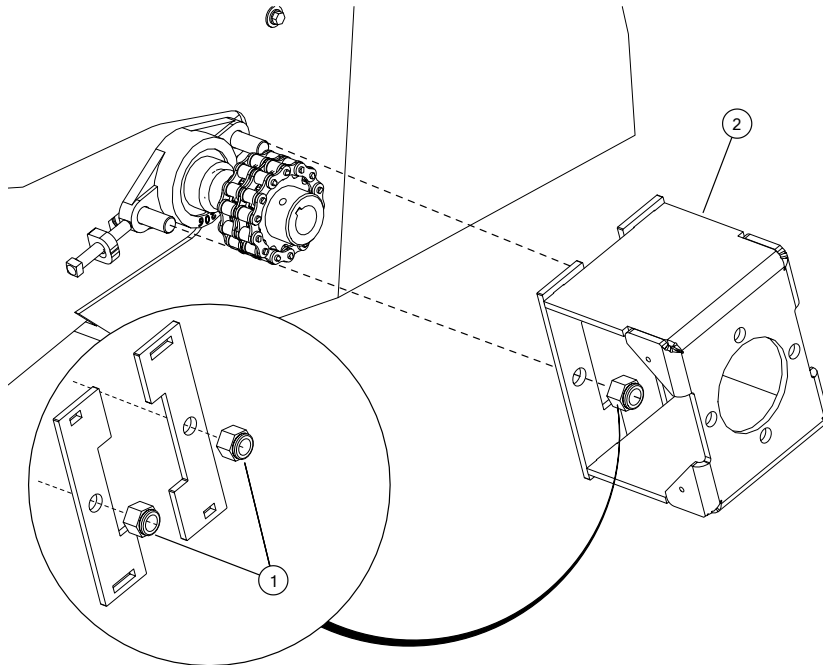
Step 1: Install the Sprockets, Keys, and Chain Couplers
